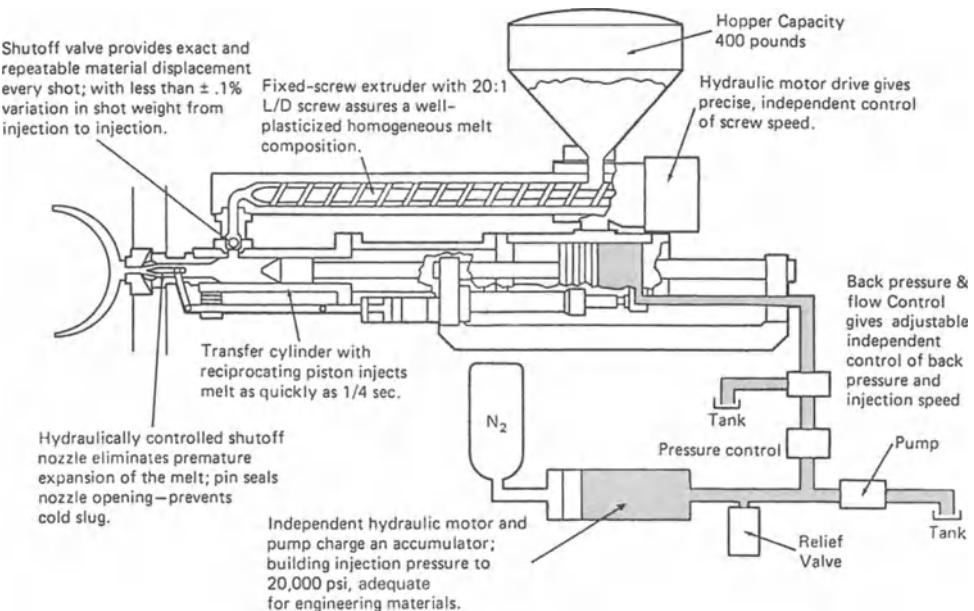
Example of a two-stage unit with a fast second-stage injection pressure system.
